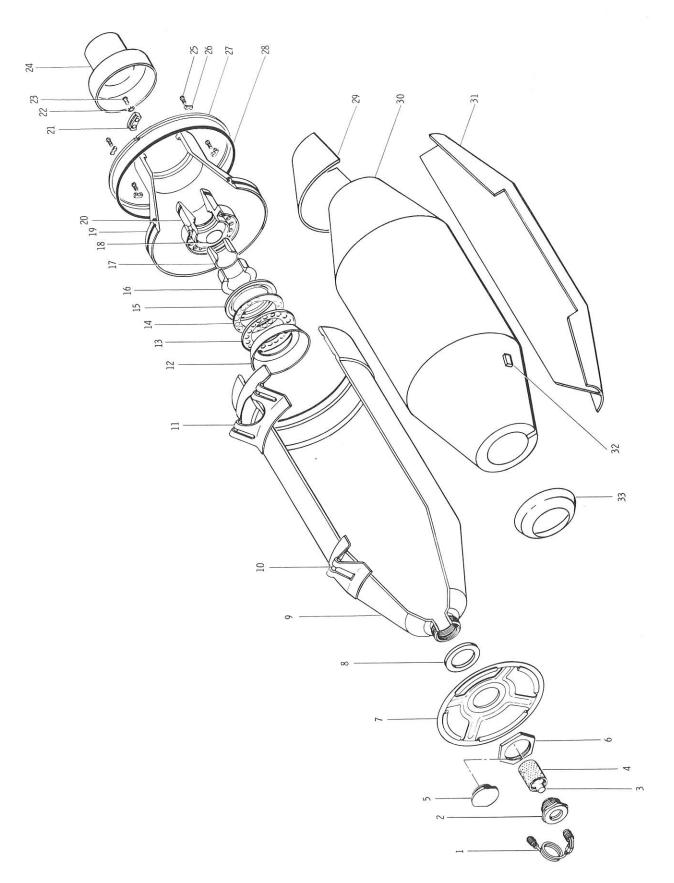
Disassembled View of 15KS-1000-A1 Aircraft Rocket Engine
